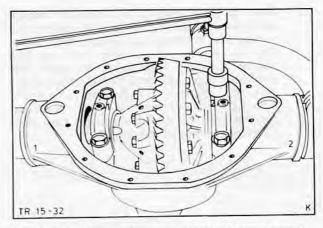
Fit bearing caps (numbers match) and torque bolts as specified
